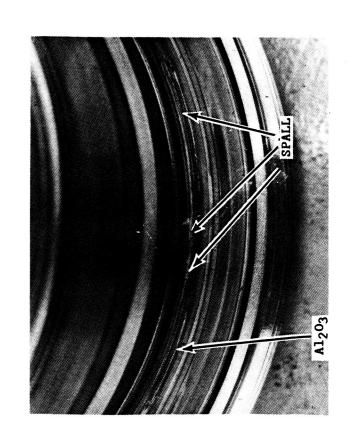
Seal Race Coating Spalls, After Build 21.
